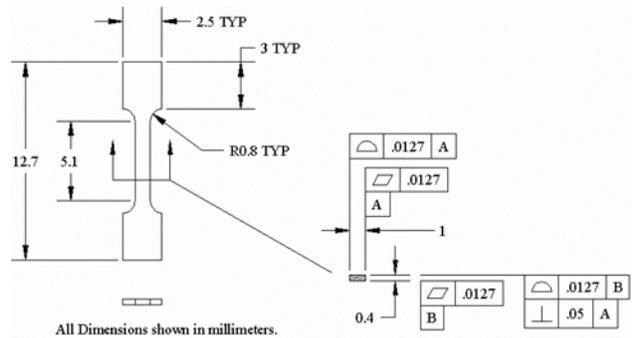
A detailed drawing of the miniature tensile specimen. All dimensions are in millimeters.
